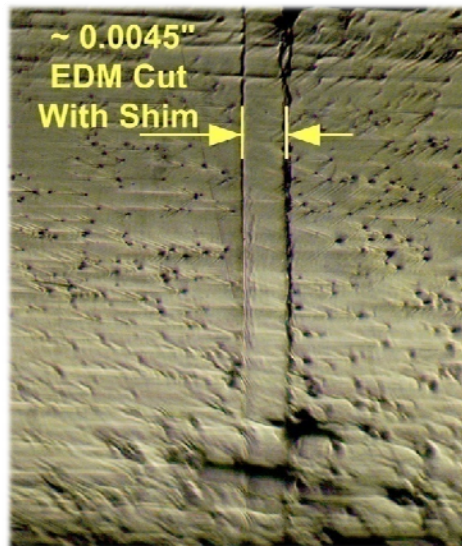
Magnified photo EDM cut in the shaft with shim installed.
